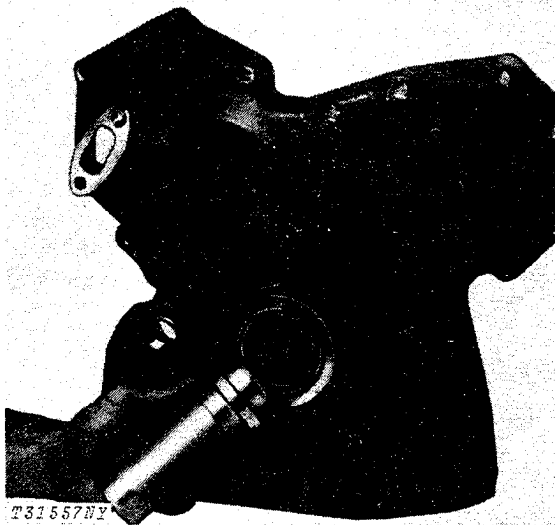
Installing Oil Seal in Timing Gear Cover Using JD-250 Driver
